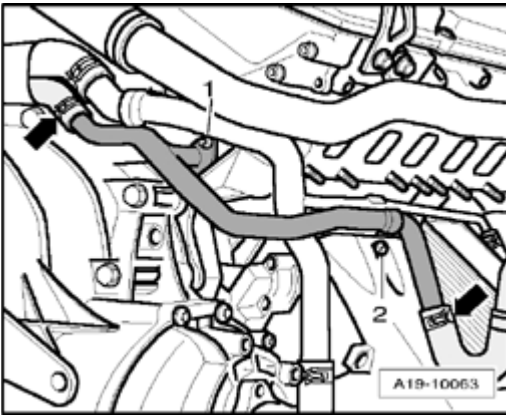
Coolant Hoses At Lower Right Coolant Pipe & Bolts
